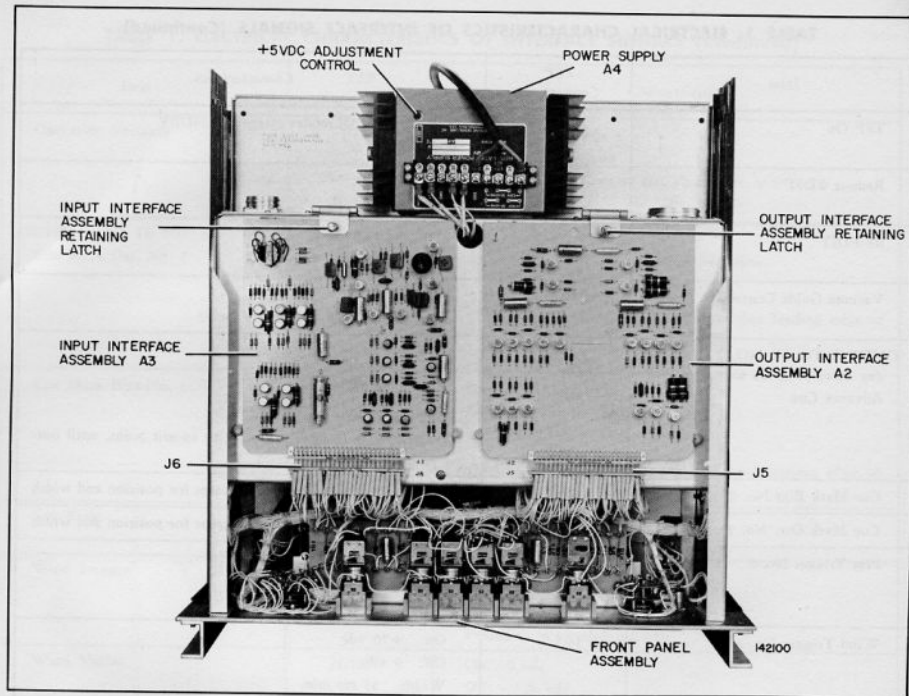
Tape Editing Programmer, Top View, Cover Removed
